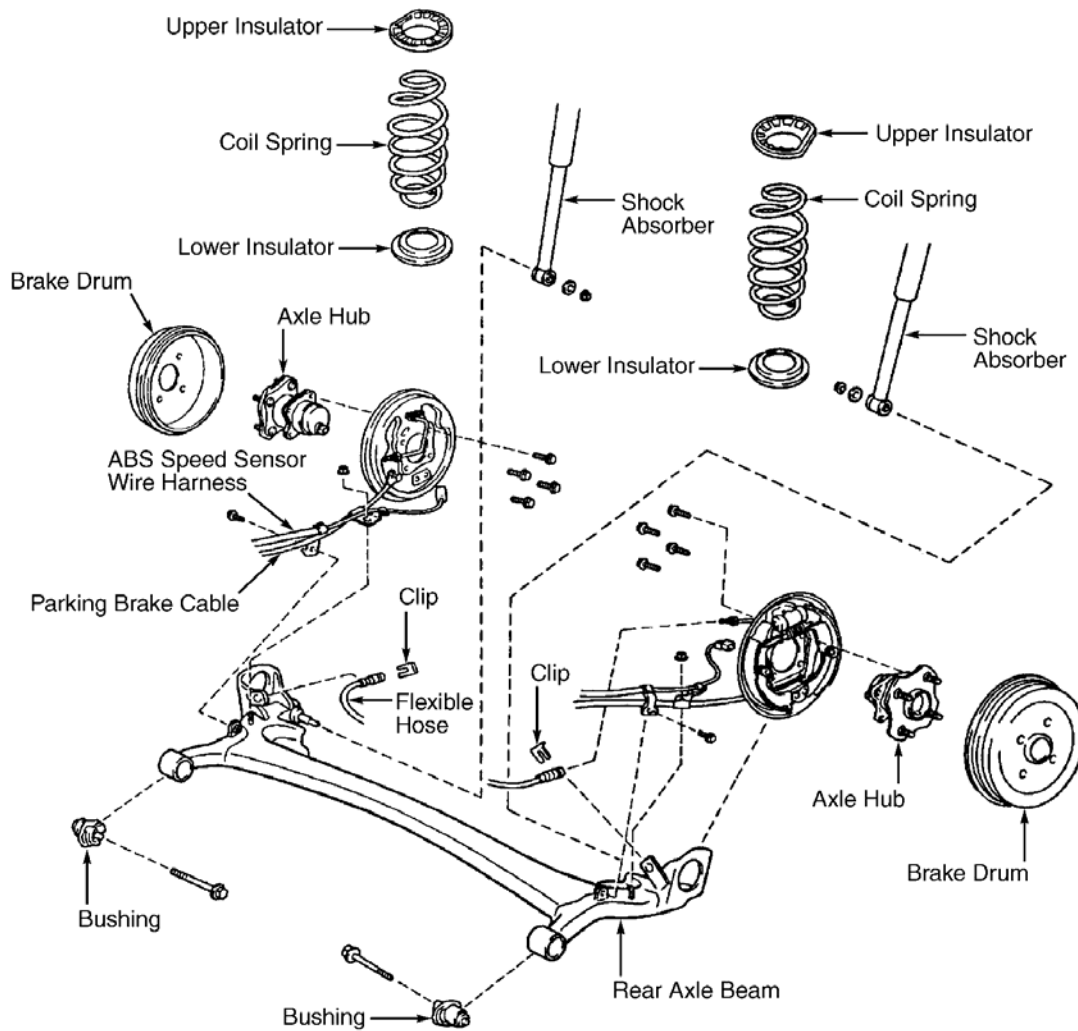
Exploded View Of Rear Suspension Components (2000 Celica)
